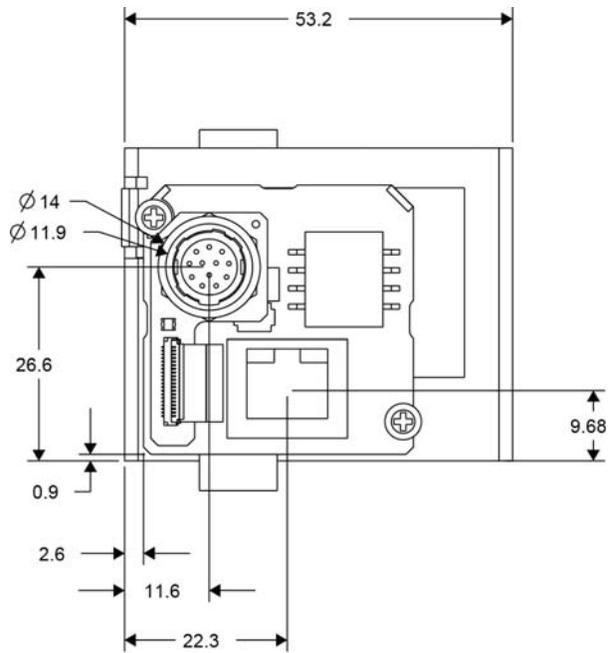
SB-GigE-EV7520A with Bracket Mounting Screw Dimensions
